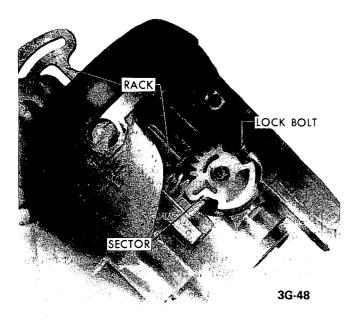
G-115 - Engaging Block Tooth on Rack to Sector
